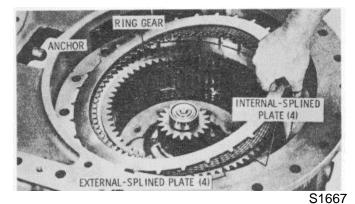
Installing First-and-Second-Gear Clutch Plates
